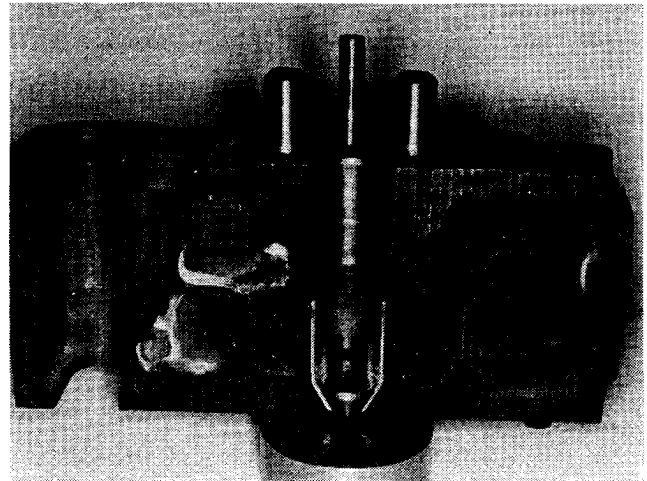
, (N10278). ST-1179 Injector Sleeve Holding Tool
